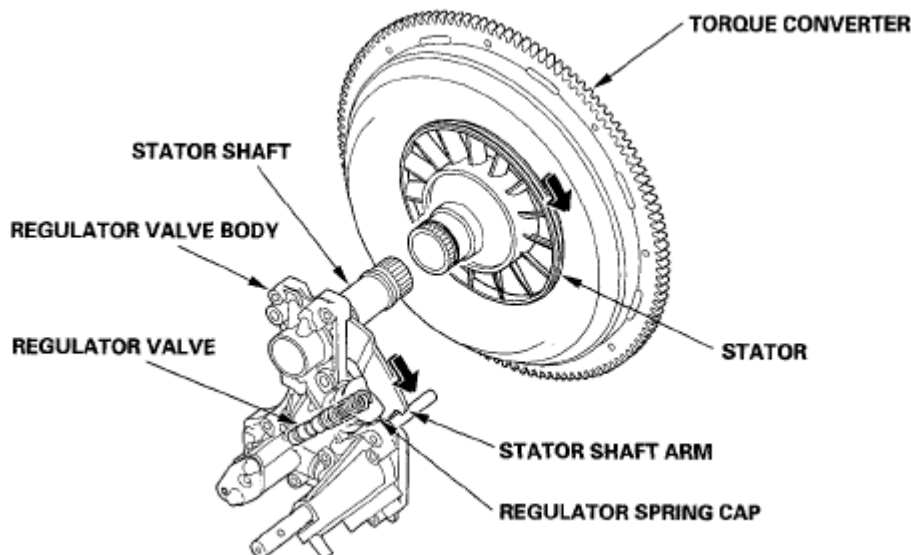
Identifying Regulator Spring Cap Pushing Direction
